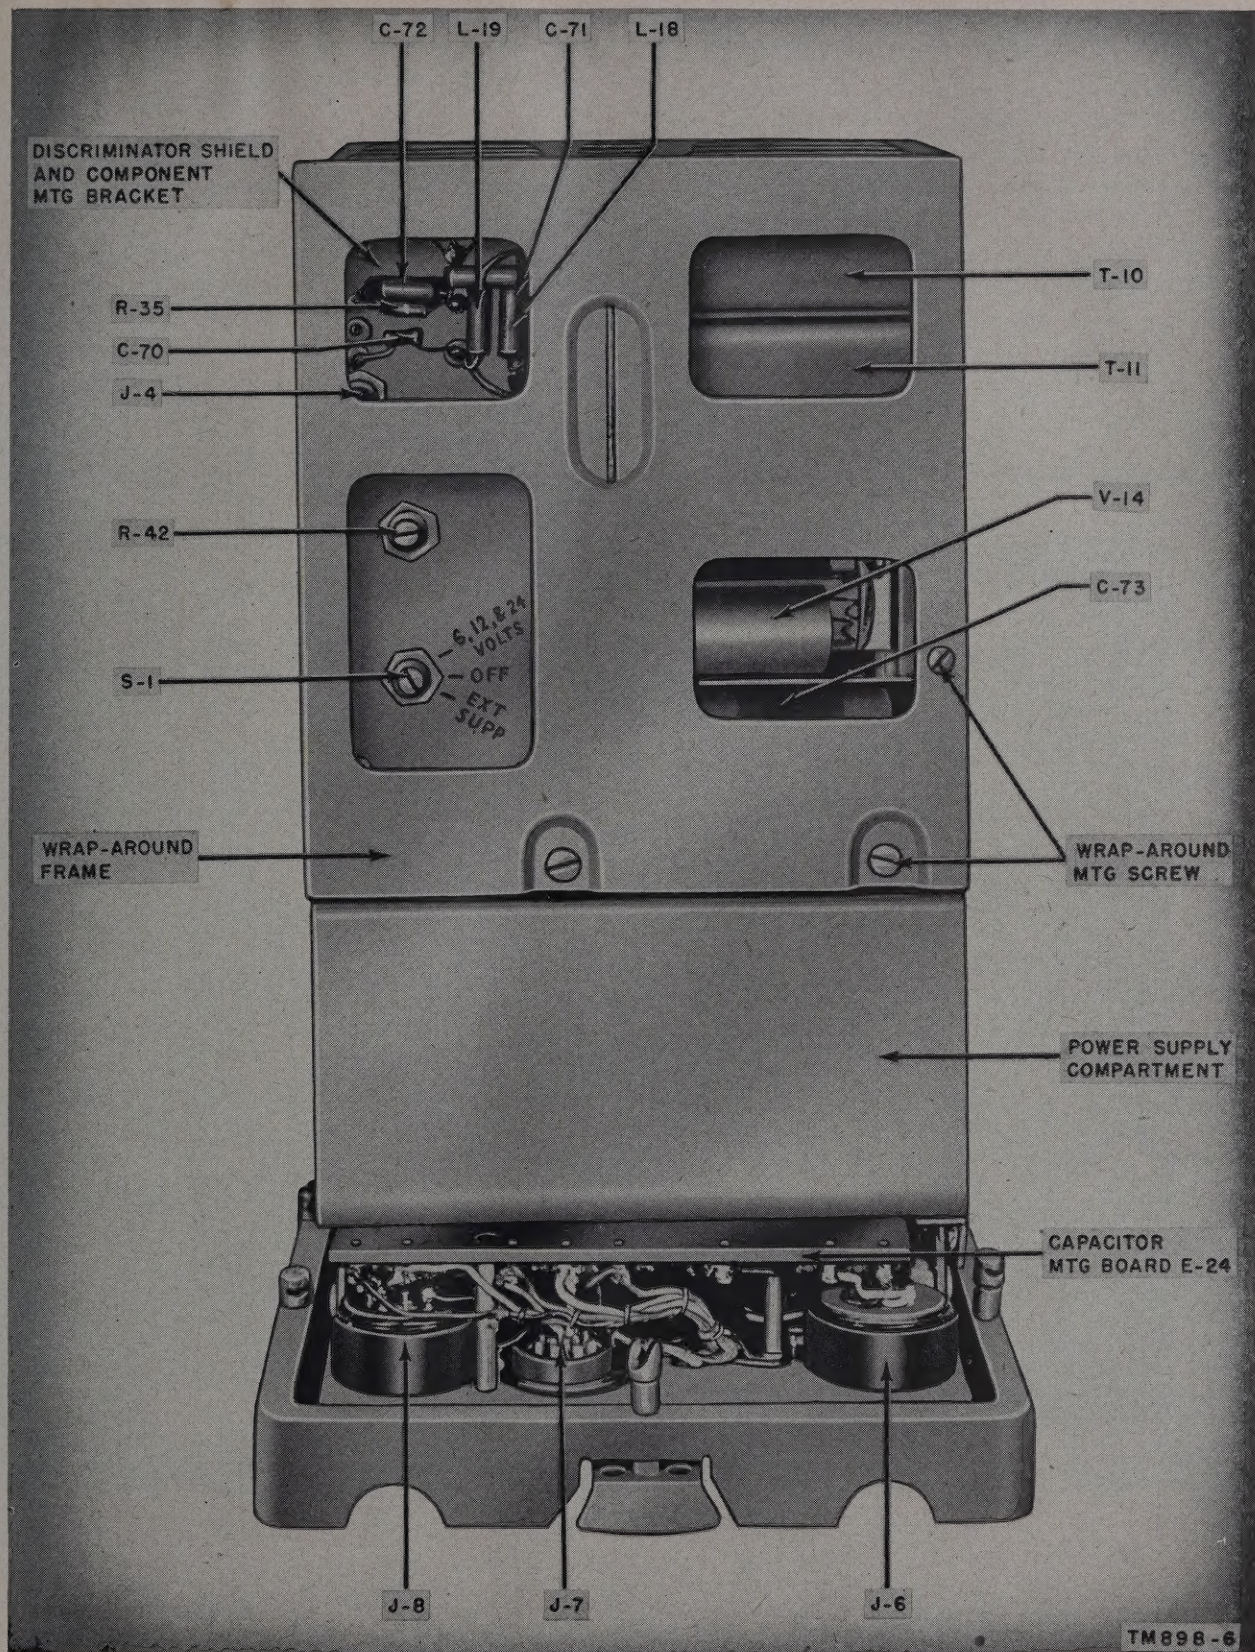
Auxiliary receiver panel-chassis assembly, bottom view.
